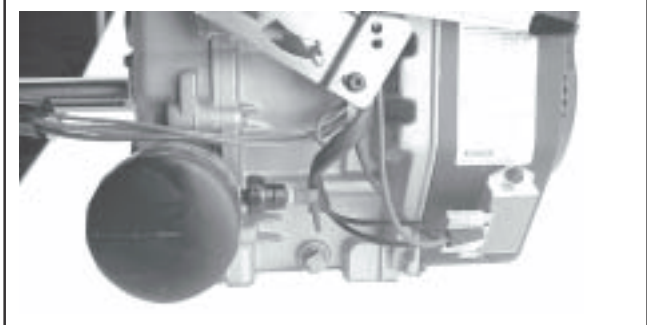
Oil Drain Plug Locations, Oil Filter, and Optional Oil Sentry™ Switch.
